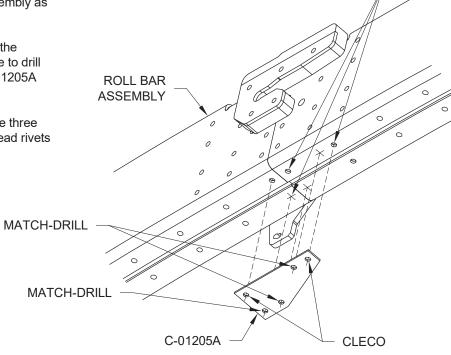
DRILLING FOR THE CANOPY LATCH BLOCK
